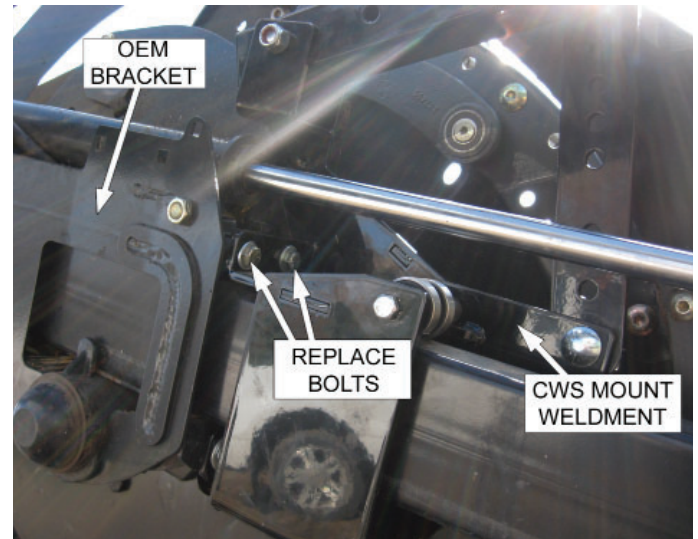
Right hand reel arm (FD70 & CIH 2162 headers)
